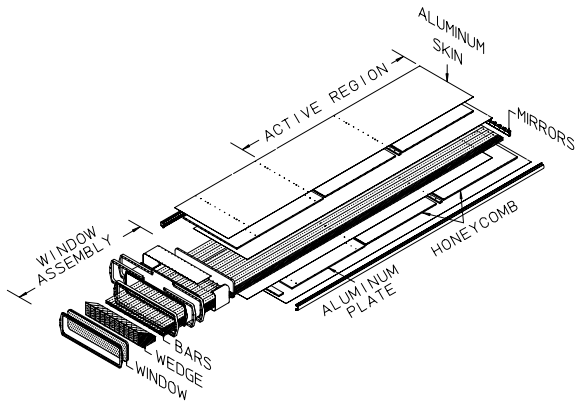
3D schematic drawing of a bar box showing the active region, mirror end and window ends
